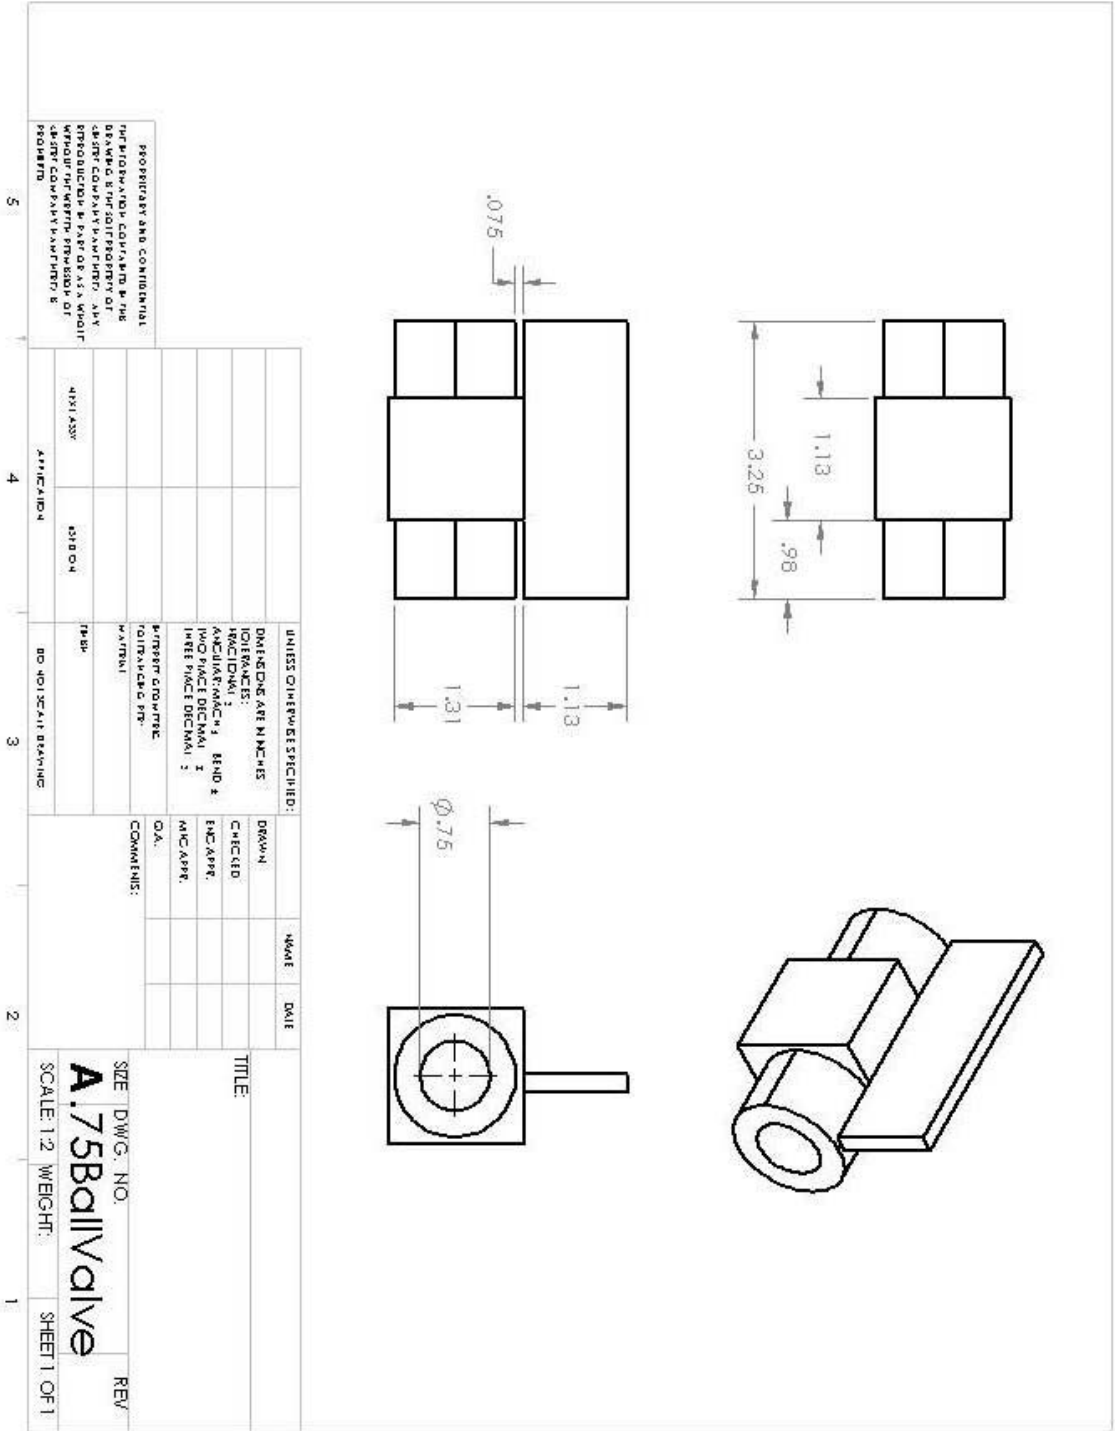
3/4" Ball Valve Dimensioned Sketch
